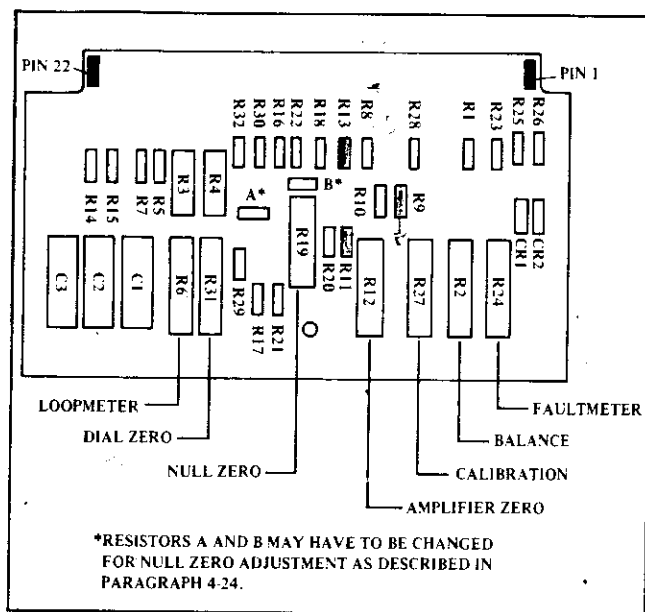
Control Module (A5) Component Identification (Dynatel Part No. 9010-0014)
